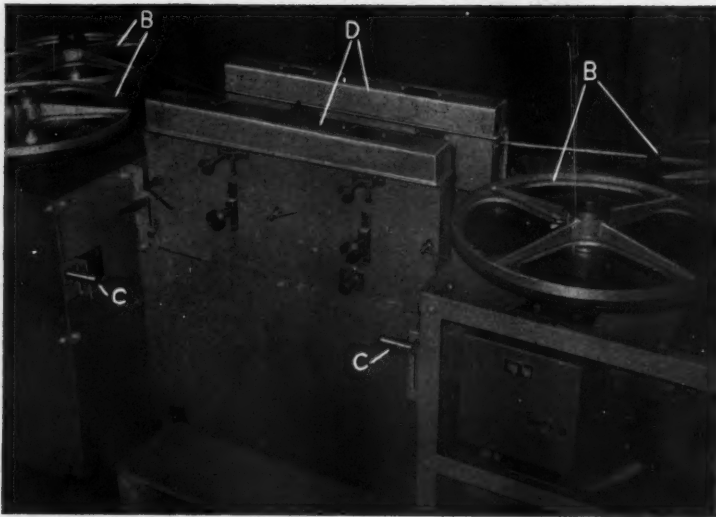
This double-sided special-purpose machine, designed and built by E. A. Knight & Sons, Ltd., is employed for edge-grinding coiled strip
